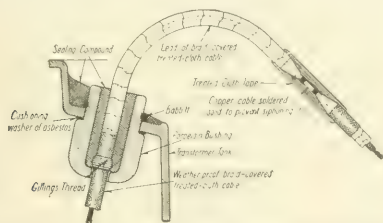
LEAD AND BUSHING FOR 2300 VOLT TRANSFORMER
